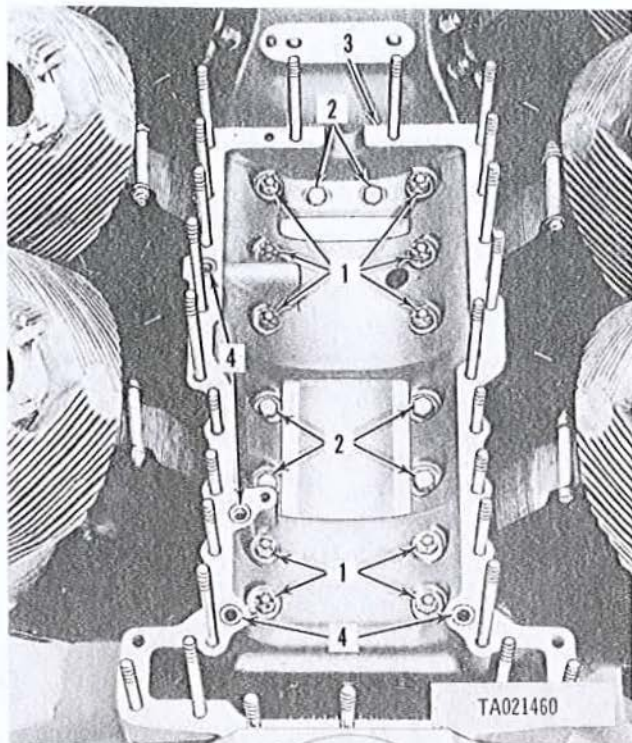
Removing or installing rear fan and accessory drive housing assembly.
